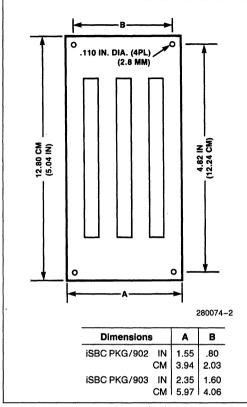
iLBX™ II Board Dimensions (iSBC® PKG/903 Shown)
